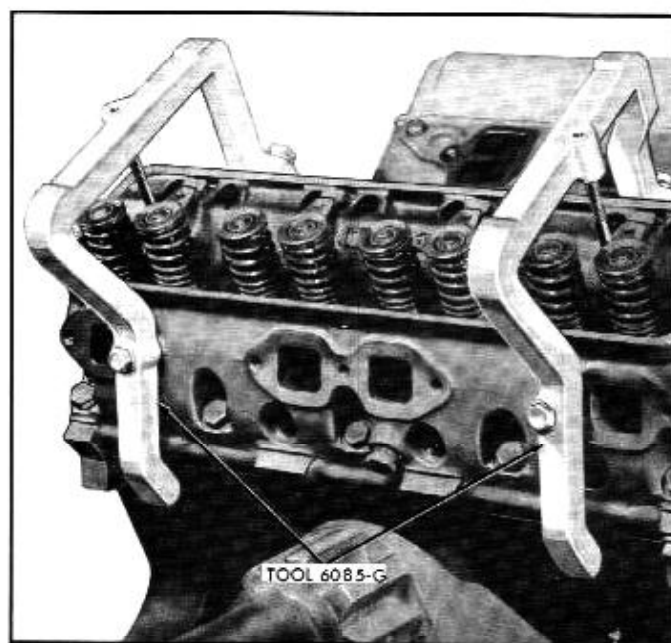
A-65—Holding Fixture Installed on Cylinder Head
